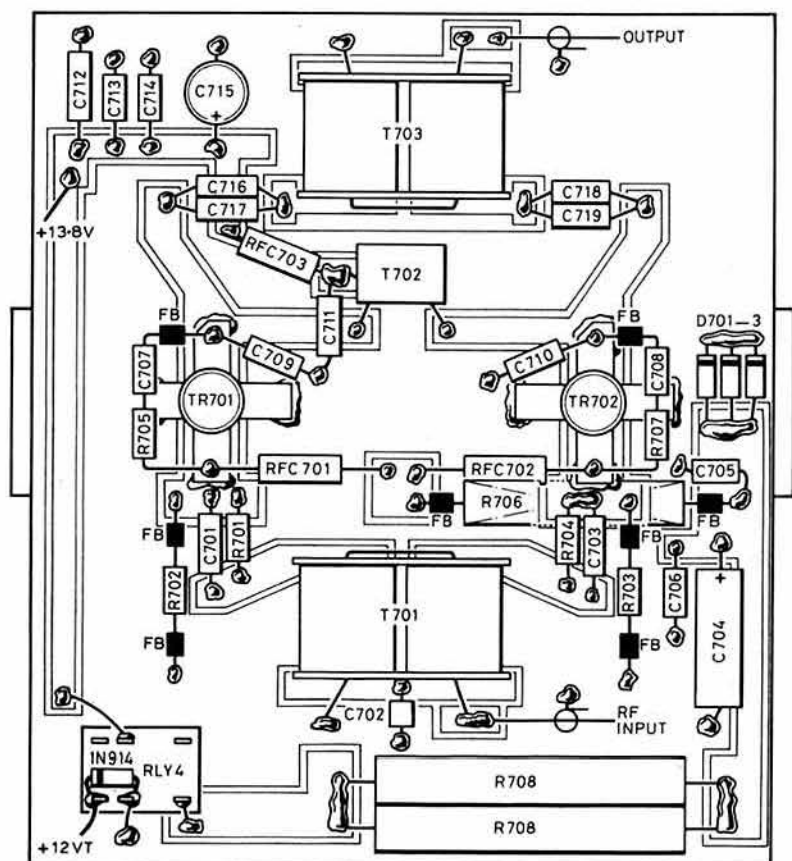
Final amplifier component layout. Components are soldered direct to etched pads. D701-3 must be tight on the board and bedded in heatsink compound
